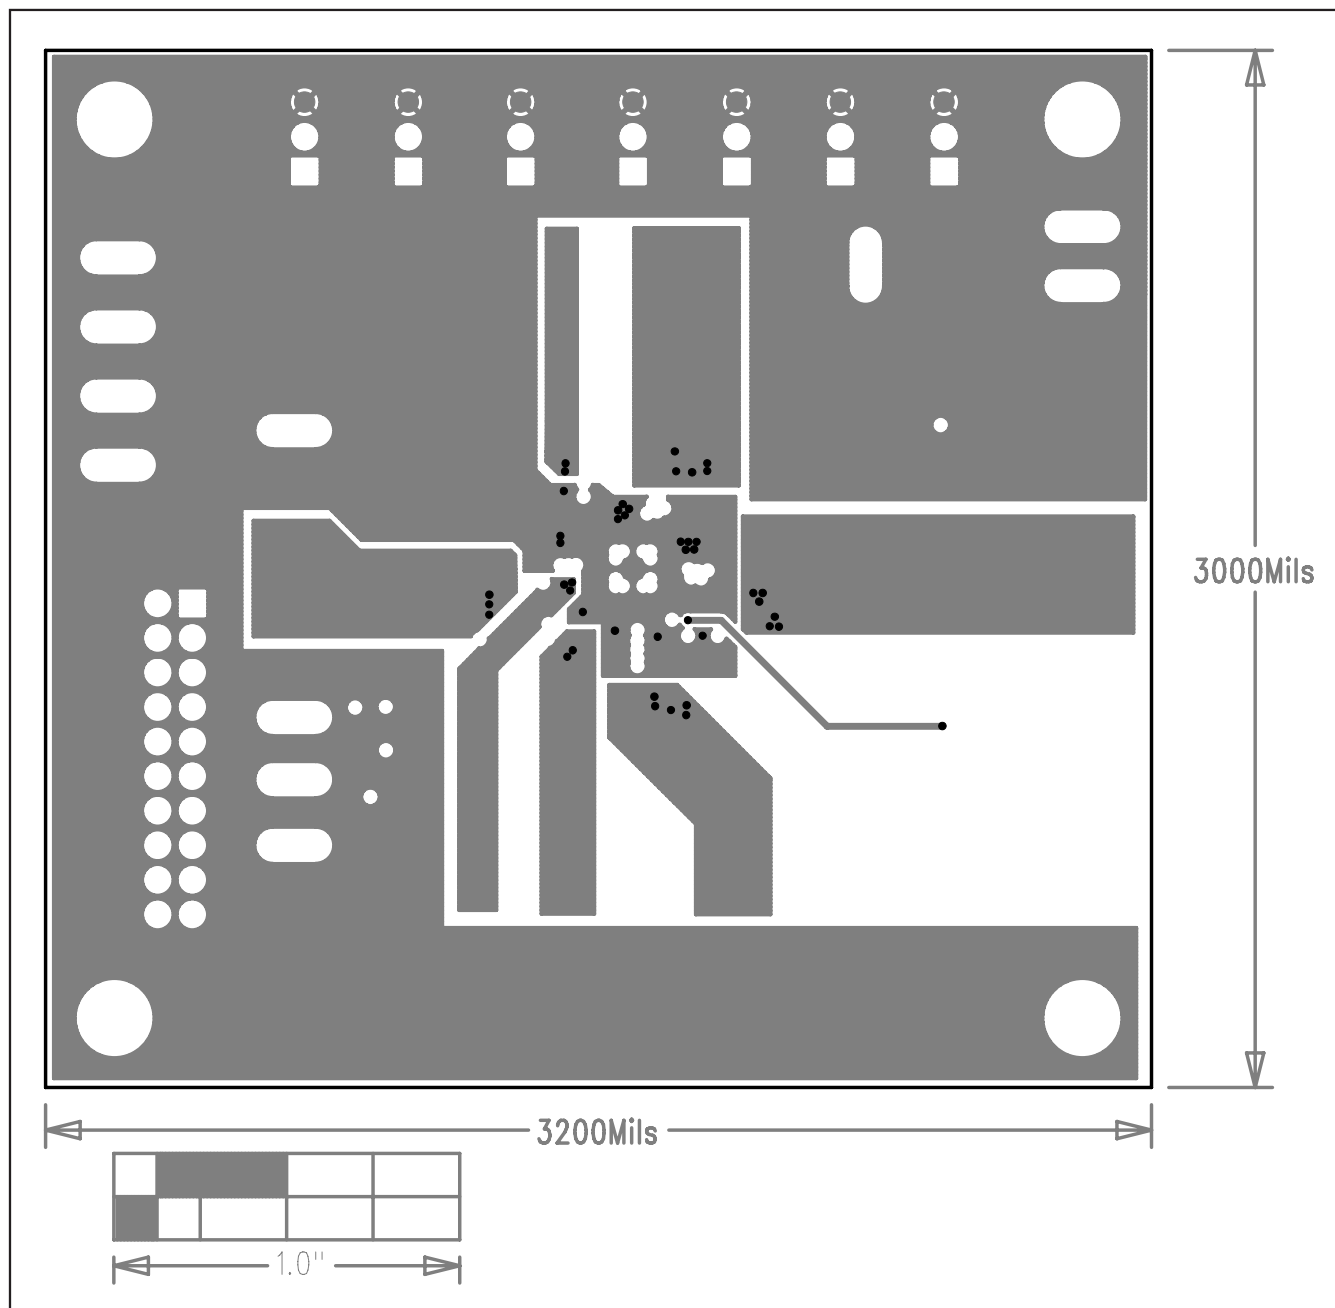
MAX8660 EV Kit PCB Layout—Power Layer 3
